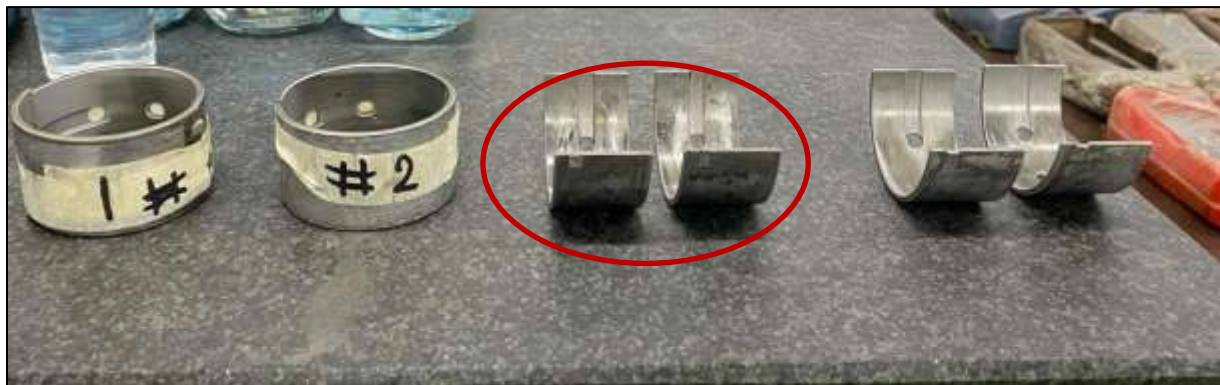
Photo showing the four (4) bearings remove from the engine with #3 bearing showing differently.
